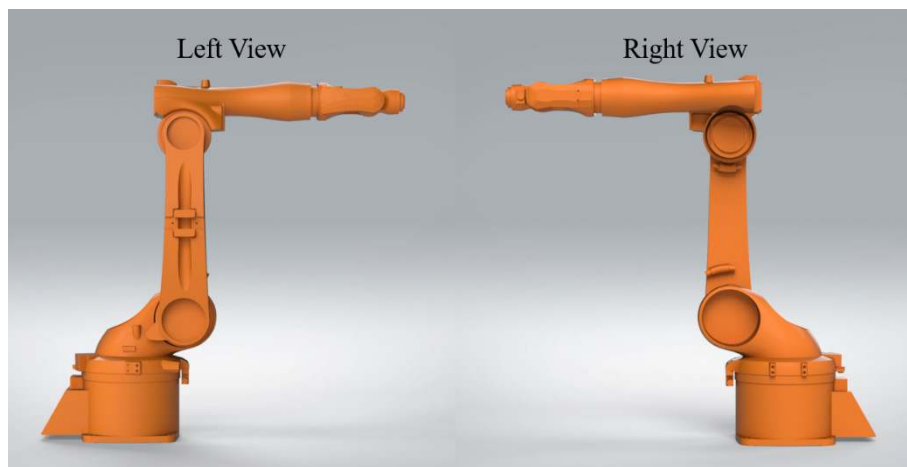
KUKA KR5 Robotic Arm Side Views
